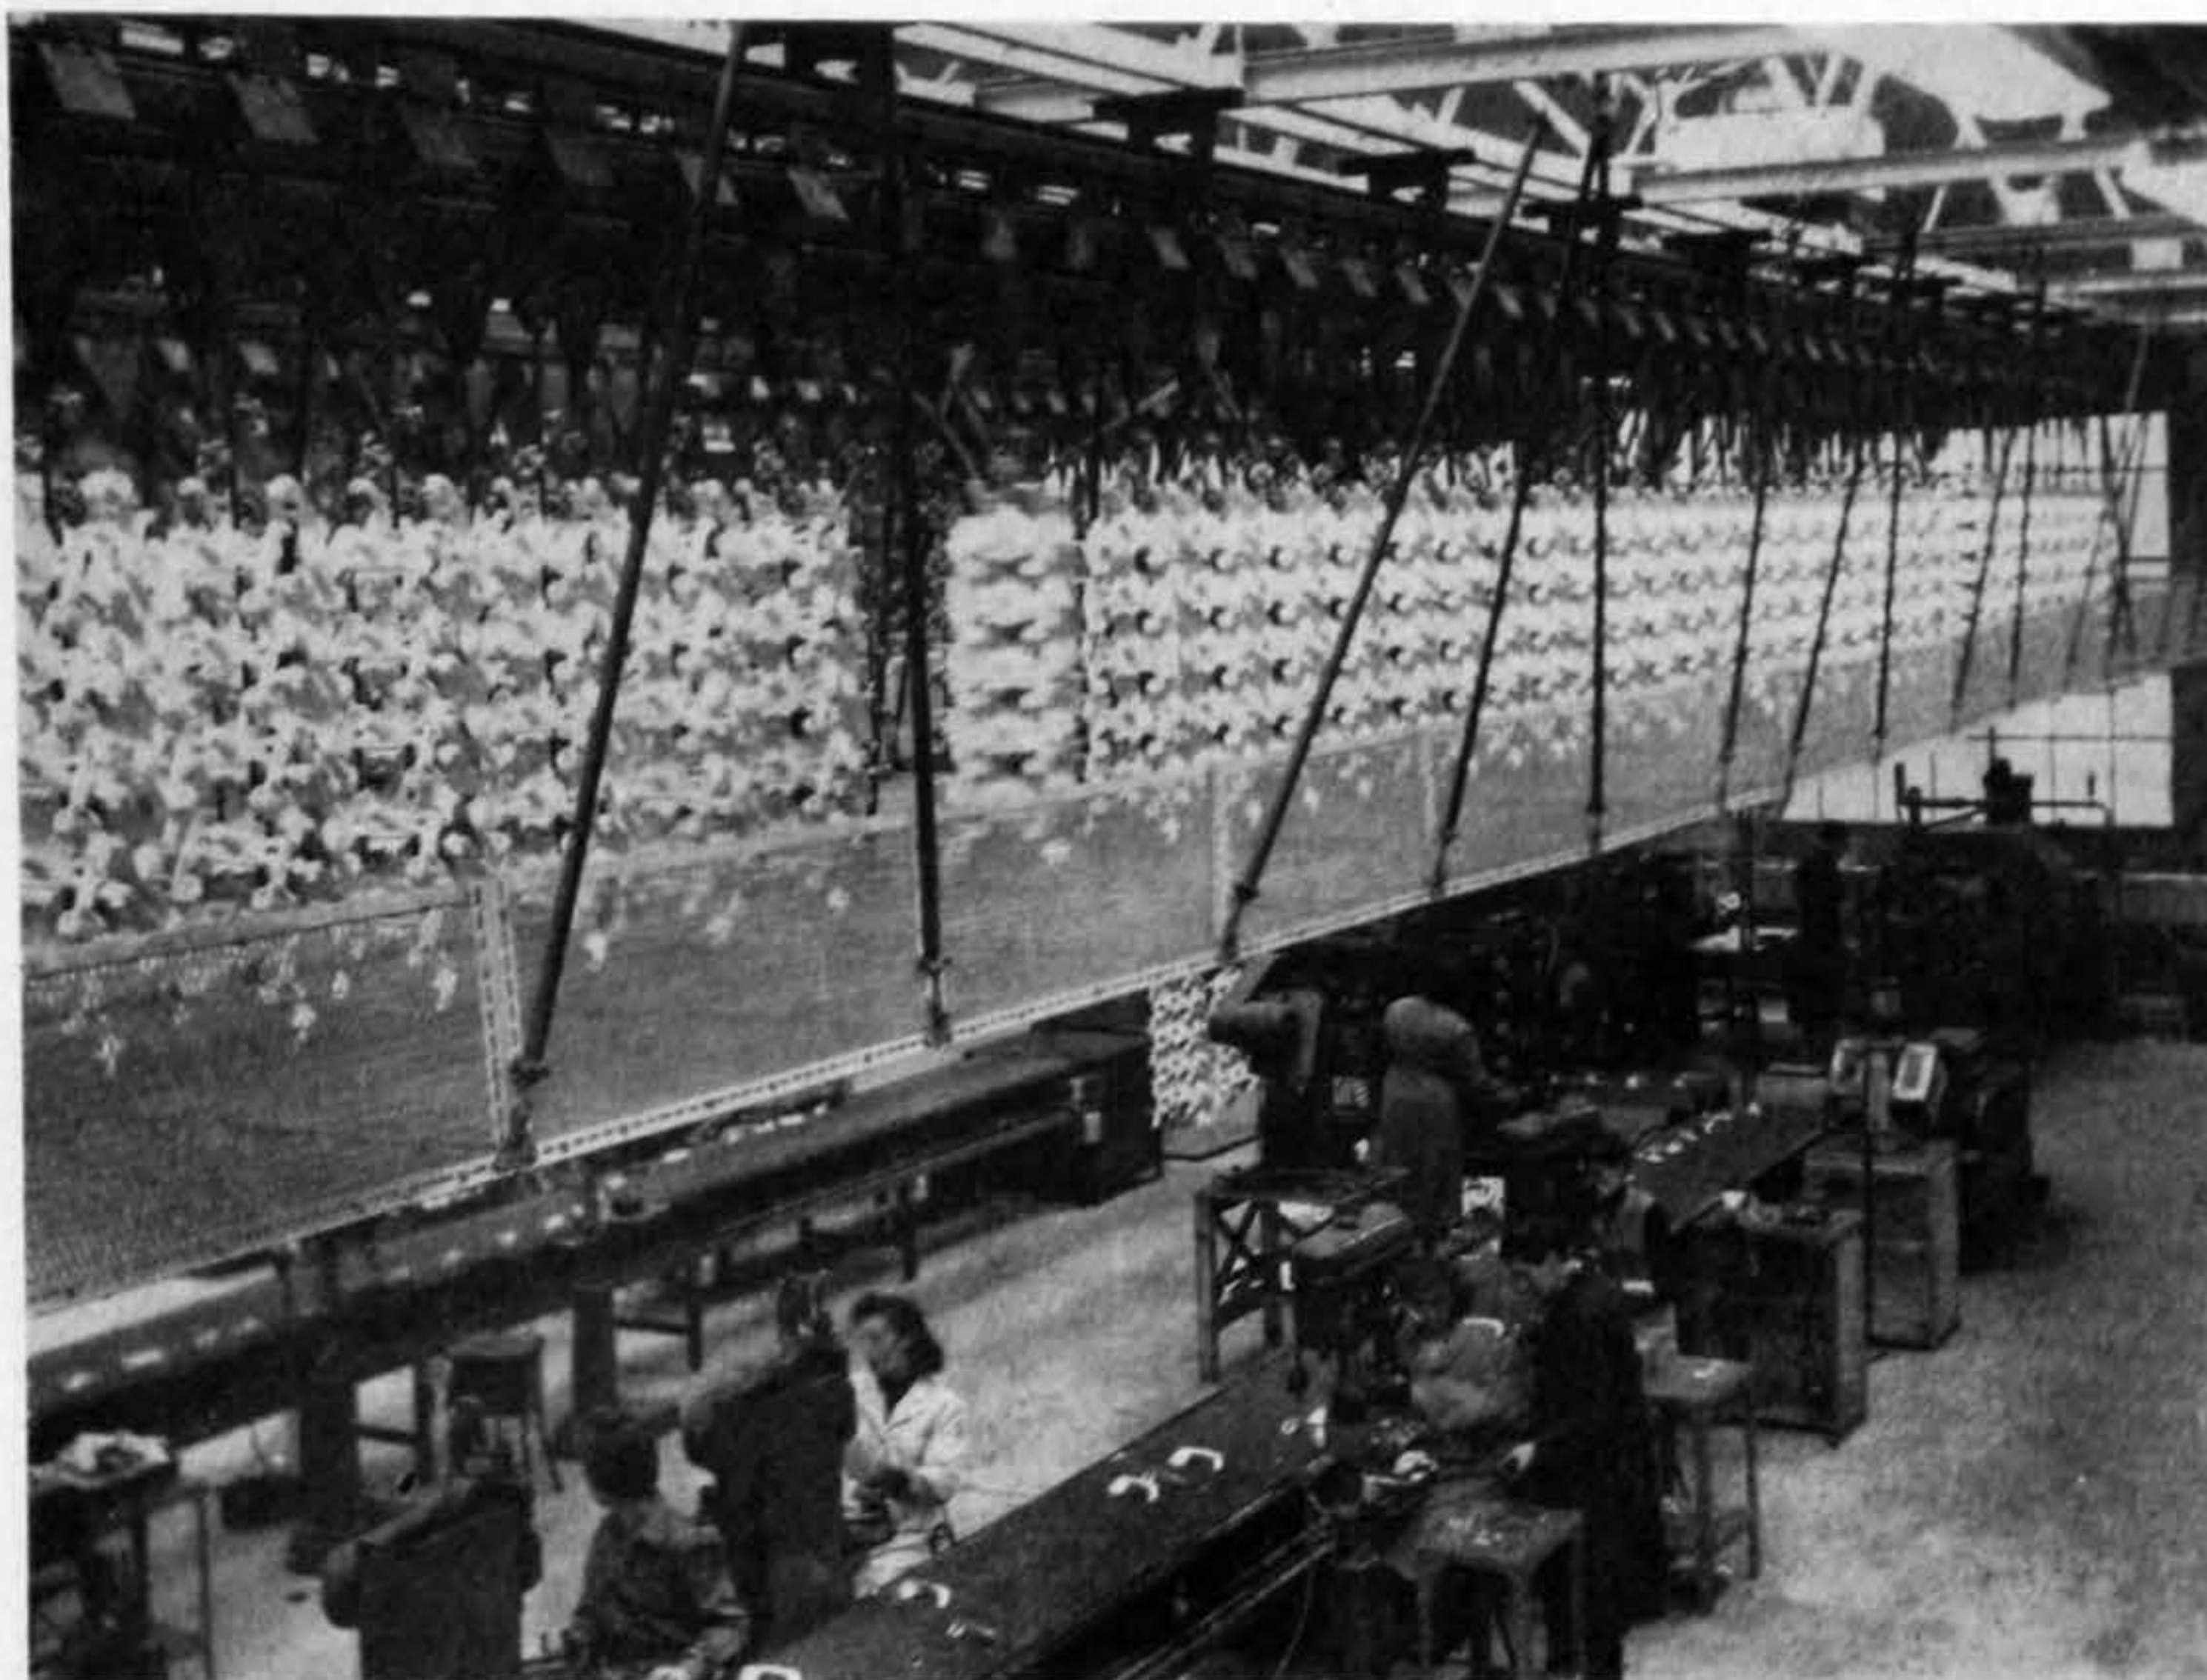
Overhead storage and transfer conveyor feeding the die casting trimming lines of floor below
